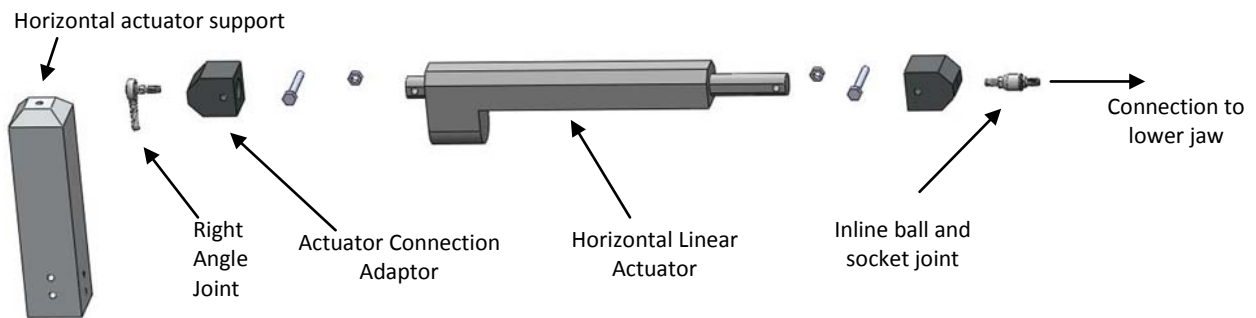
Exploded view of the horizontal actuator assembly. The view, from left to right, represents the assembly from the back of the prototype to the connection to the lower jaw.
